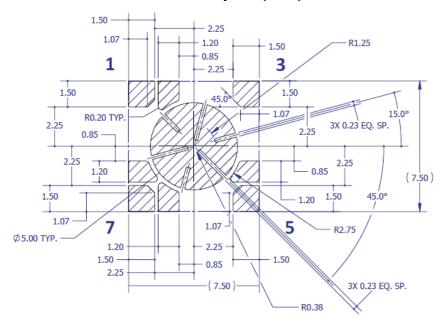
Recommended solder pad layout for anode, cathode, and thermal pad.
